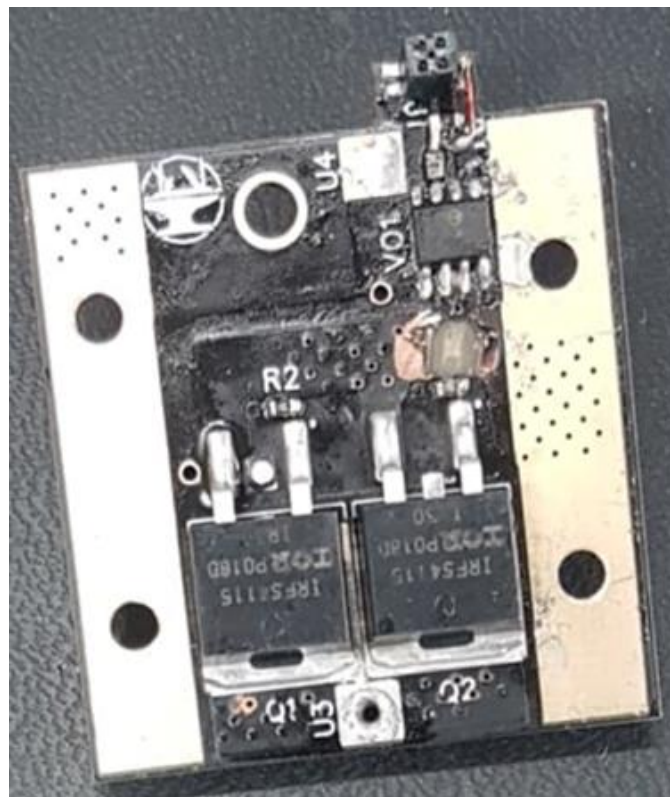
A failed power switch board. Note the crater between Q2 and VO1 due to the circuit failing closed.
